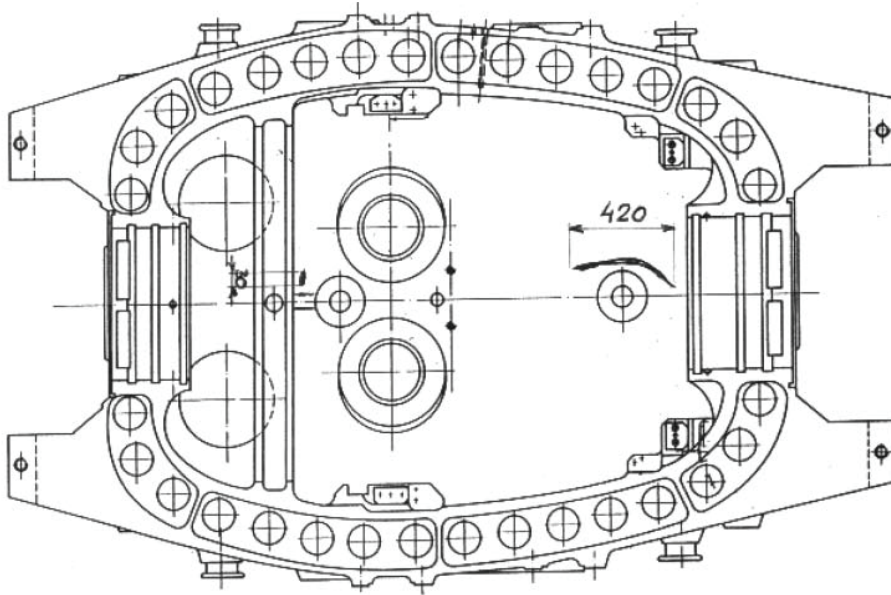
Location of cracks on the bottom part of high pressure outer casing
